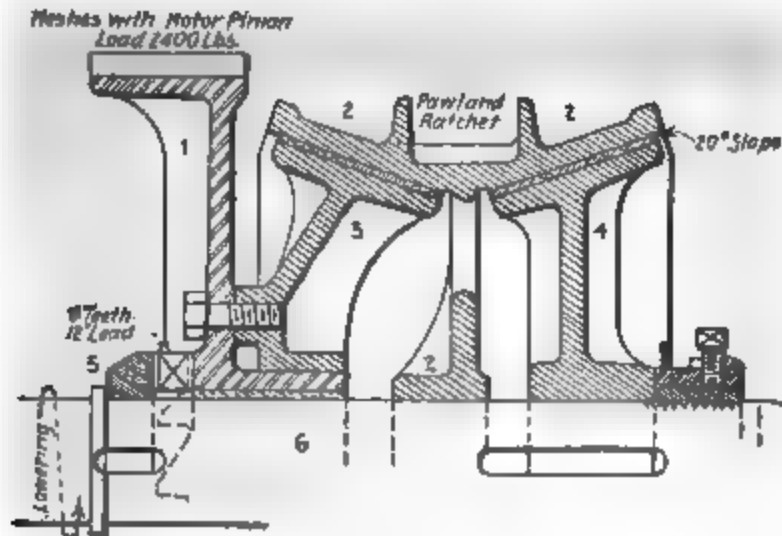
Cone Brake for Gantry Crane Full Load Torque = 30,400 In-Lbs.
